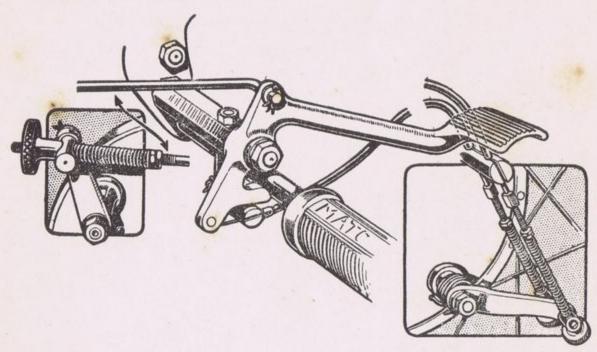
Showing the Matchless Brake Inter-Connecting Gear and Finger-tip Adjustment
